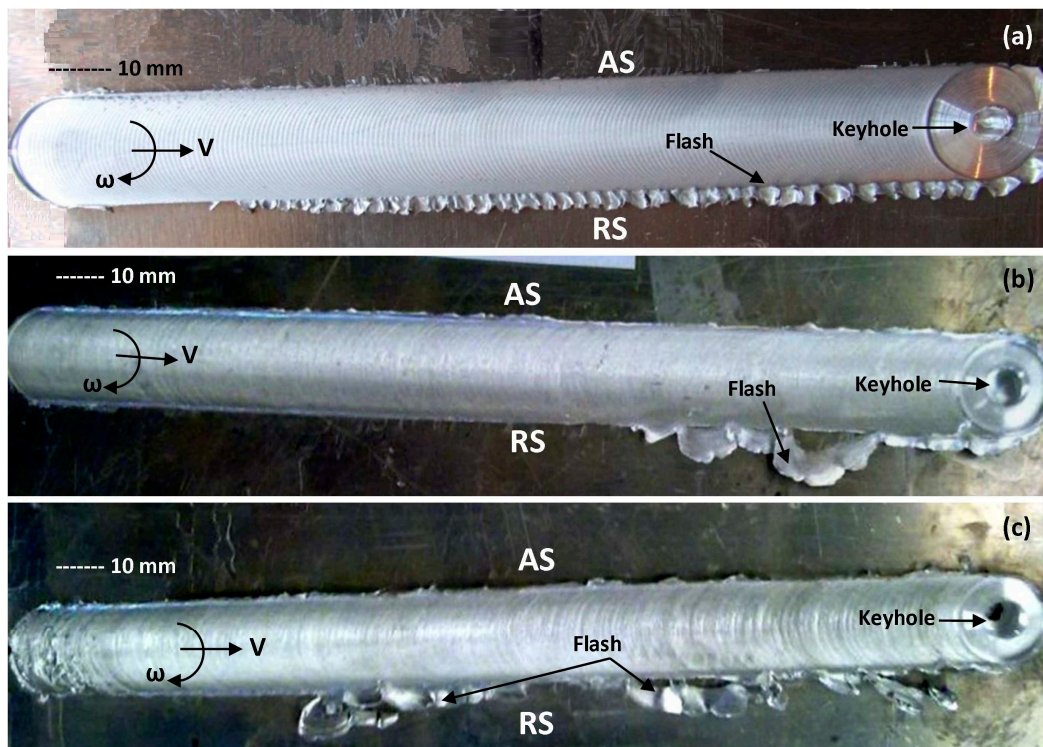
Surface appearance of the weld for conical FSW tool in constant feeding rate; (a) at the welding speeds of (1120 rpm and 150 mm/min) and (b) at the welding speeds of (1120 rpm and 315 mm/min).
